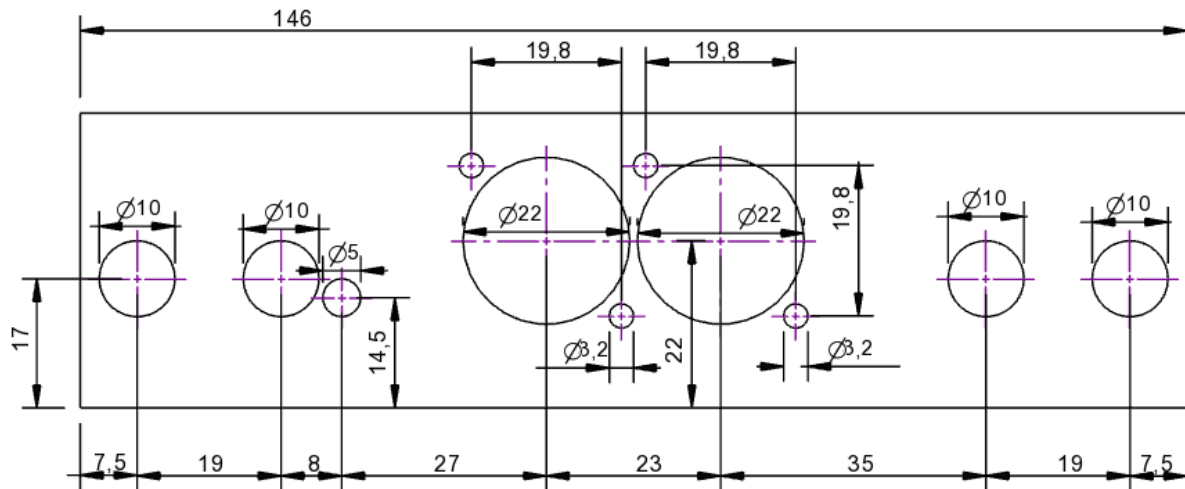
Back plate mounting holes (Scale 1:1 if printed on A4)
